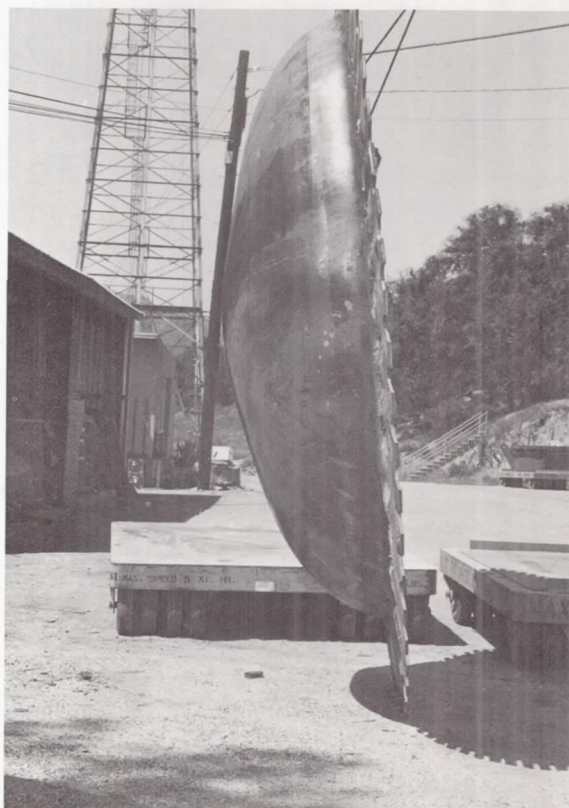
Complex shapes formed in heavy metal by explosive forming.
